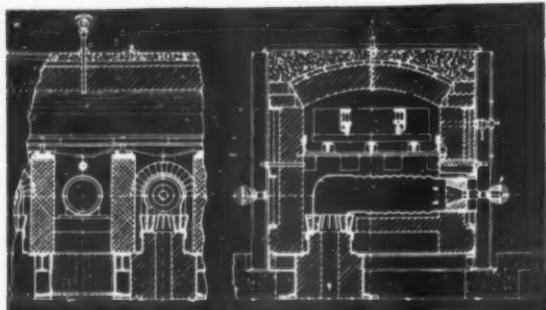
Sections of the carburising furnace, showing the heating arrangement and the manner in which the work is moved through the furnace.
